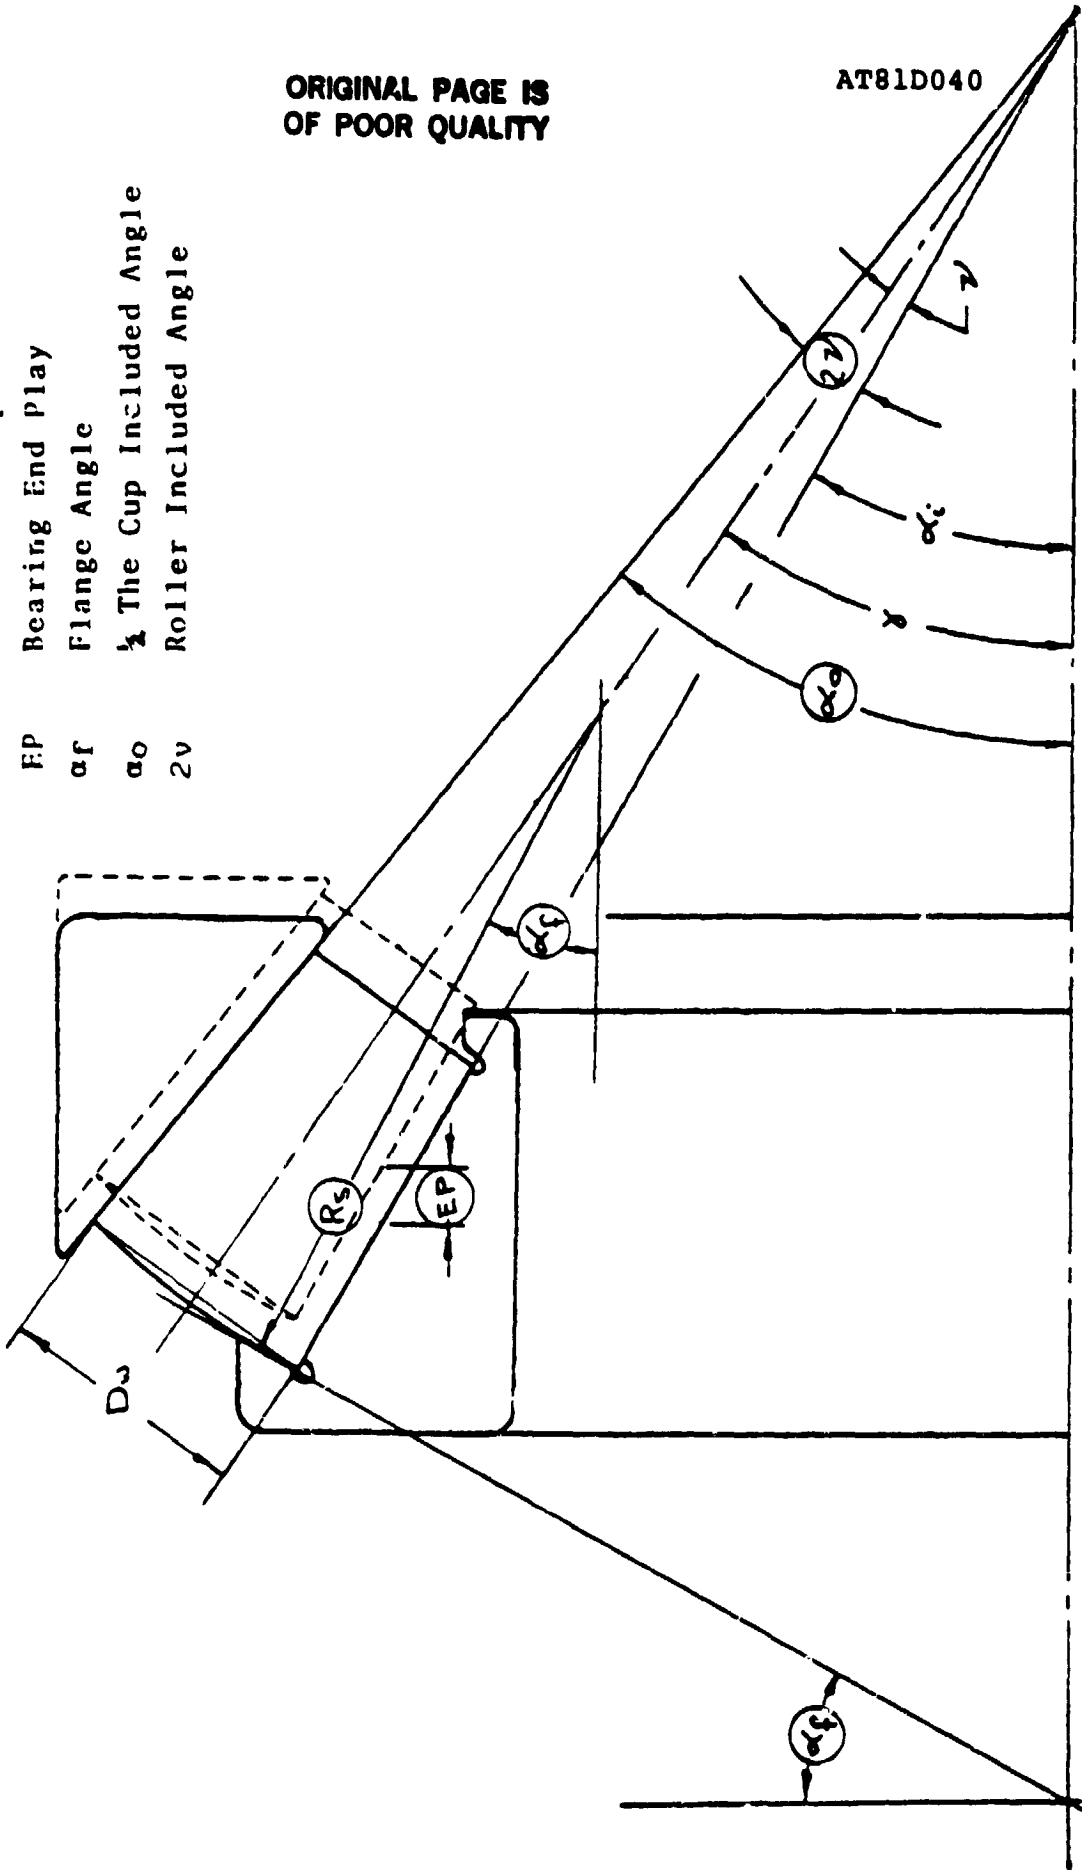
TAPERED ROLLER BEARING GEOMETRY
